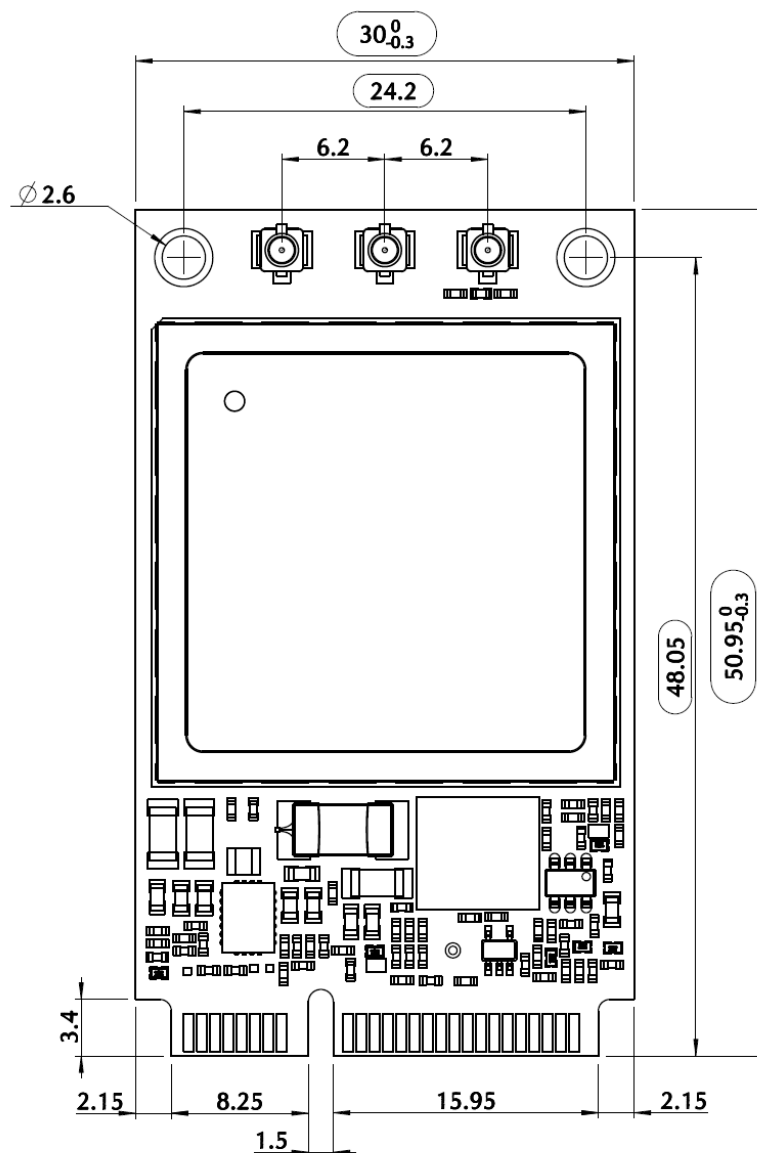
LE910Cx-mPCIe (with SIM Holder) Mechanical Top View
